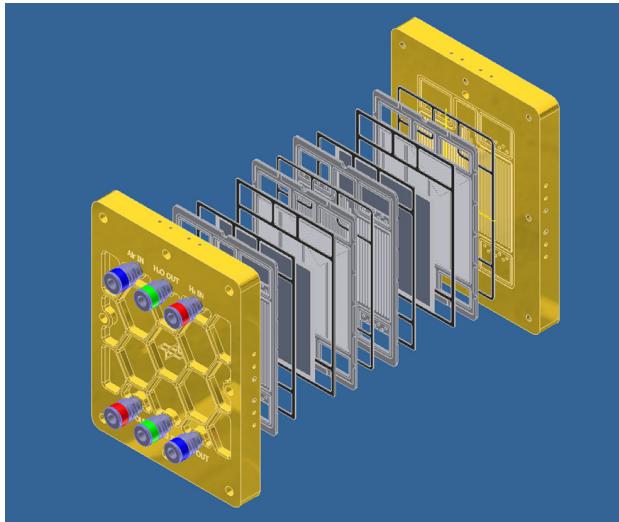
Exploded assembly view of the current configuration of the DLR-stack.
